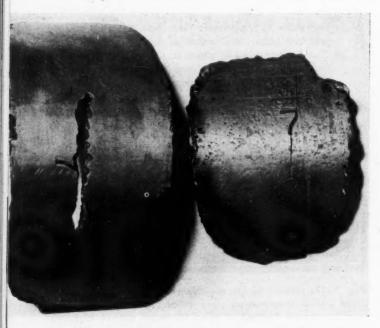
Fatigue failure caused by a small surface rupture; in this case the indentation of an inspector's stamp
